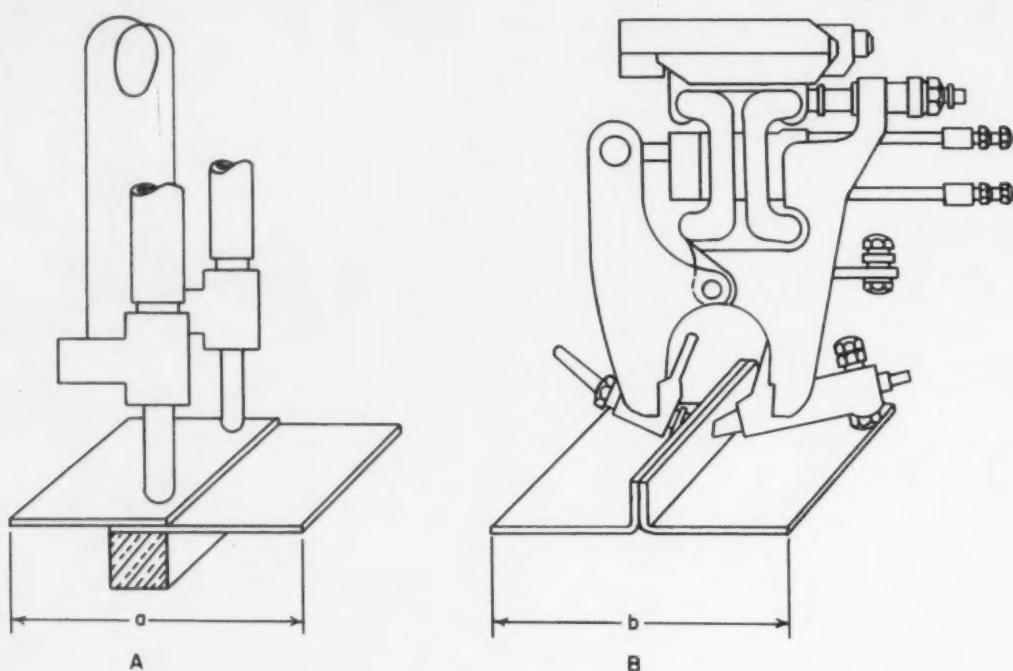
Lap joints, such as the one at A, can be handled with low-cost tooling in welding presses. As shown at B, relatively expensive tooling is necessary for coach, or pinch, joints.
